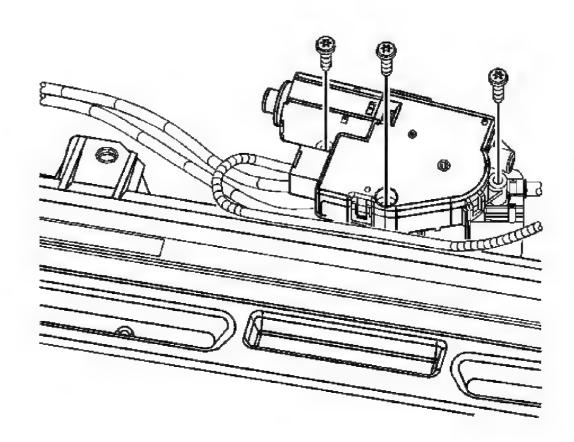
View Of Sunroof Motor/Actuator, Electrical Connector & Screws Courtesy of GENERAL MOTORS CORP.
